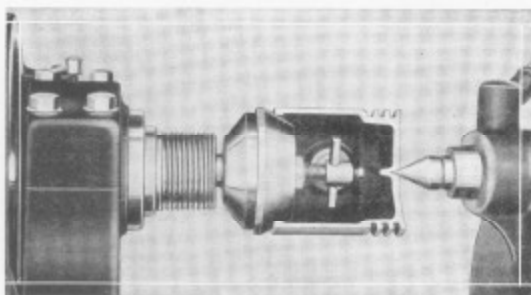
Cross Section of a Piston Mounted on a No. 44 Piston Adapter Ready for Machining
